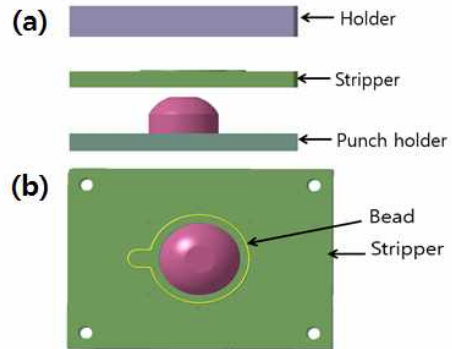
Thermoforming mold structure (a) front view, (b) middle stripper with bead
